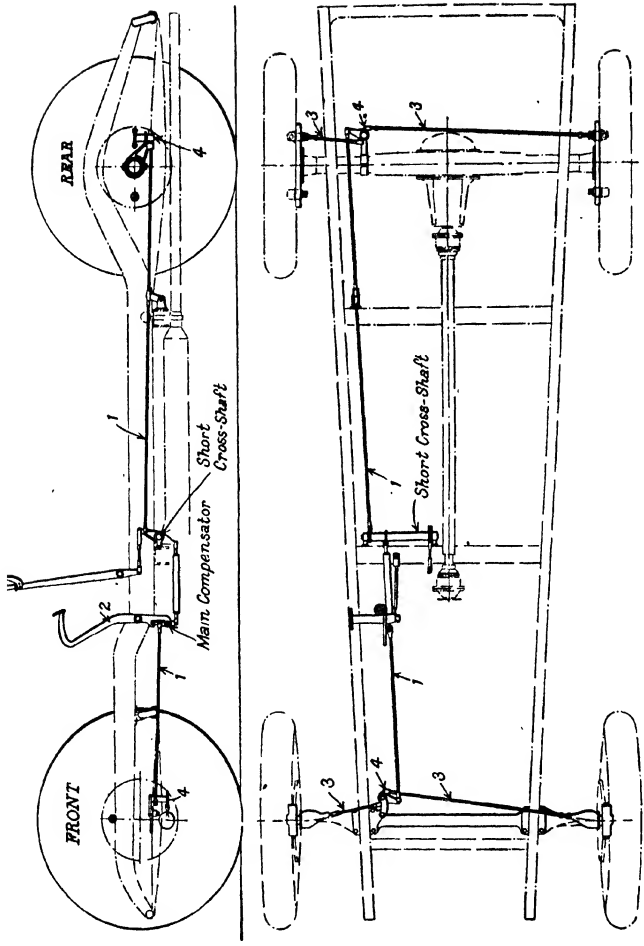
TYPICAL CHASSIS LAY-OUT OF A GIRLING BRAKING SYSTEM, IN ELEVATION AND IN PLAN
